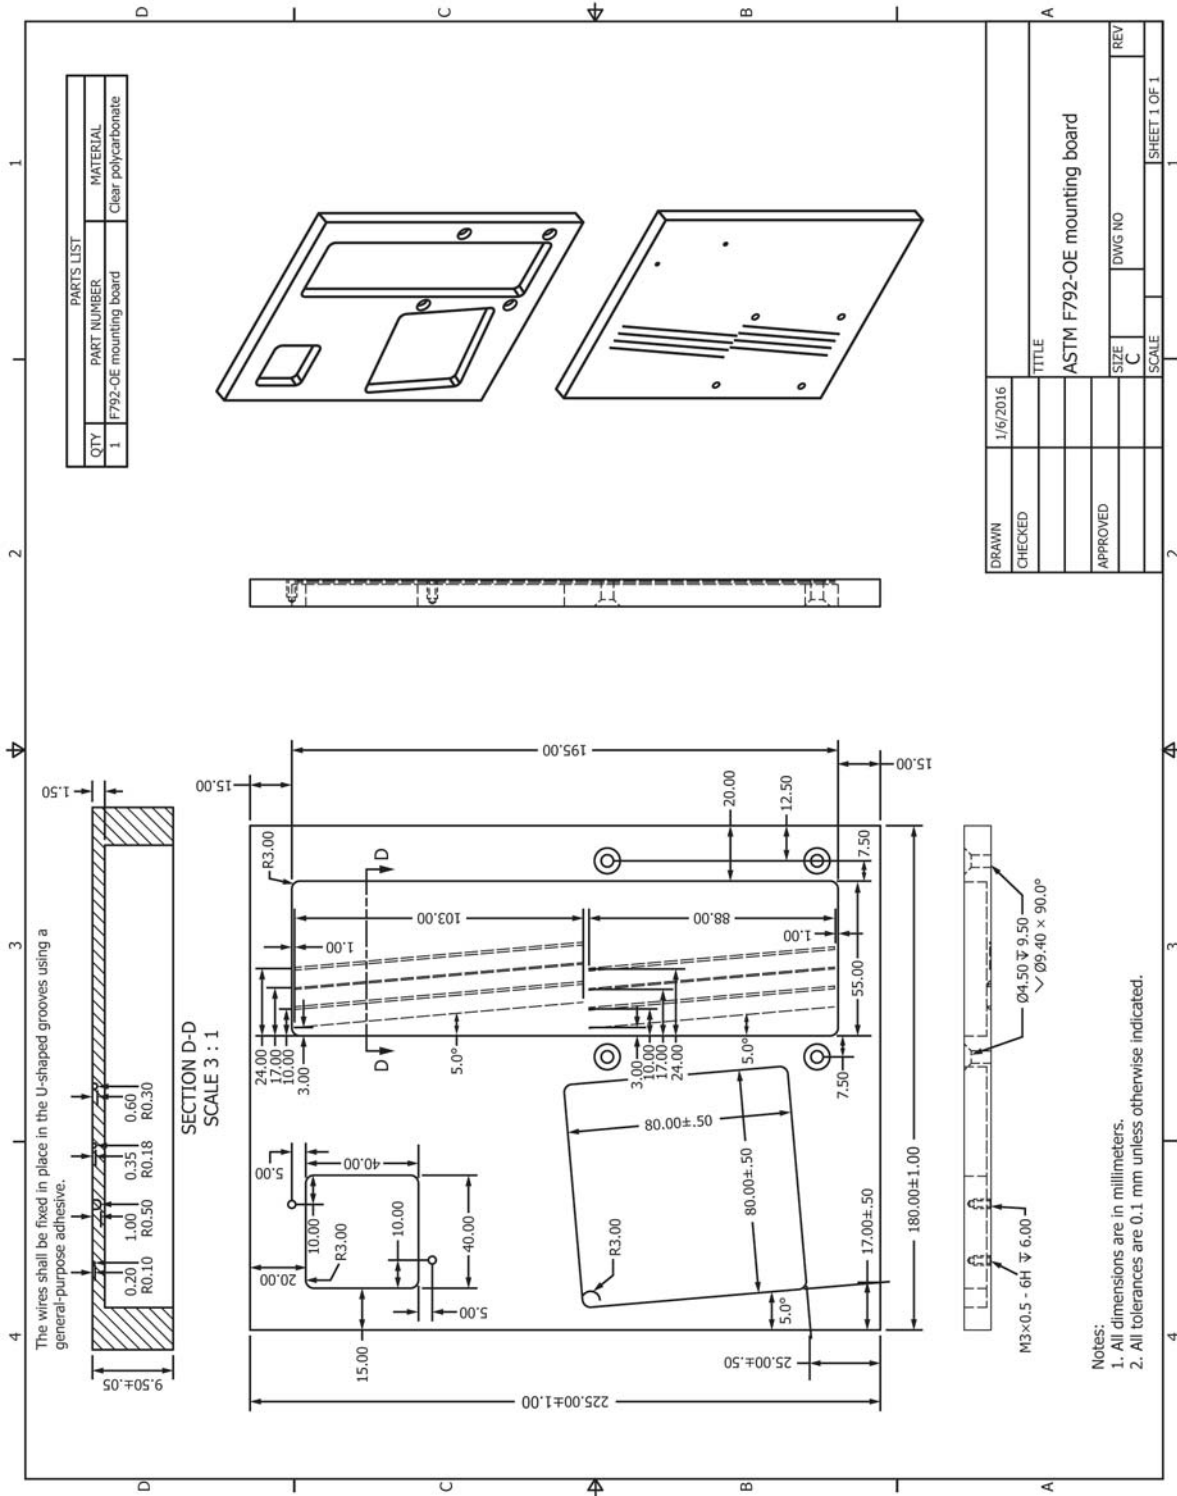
Mechanical Drawing of the Polycarbonate Practice F792 - OE Mounting Board
